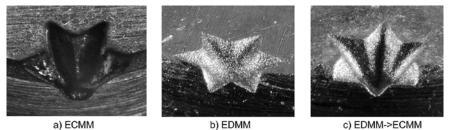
Photographs of cavities machined during electrochemical sinking (a), electrodischarge sinking (b) and sinking when using the EC/EDMM sequence (c) [14].
